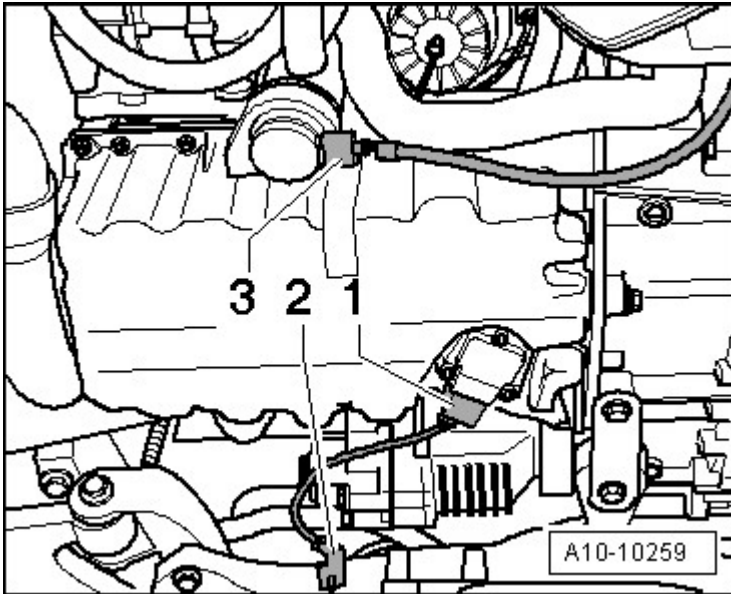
Oil Level Sensor, Retainer And Coolant Pump Motor
